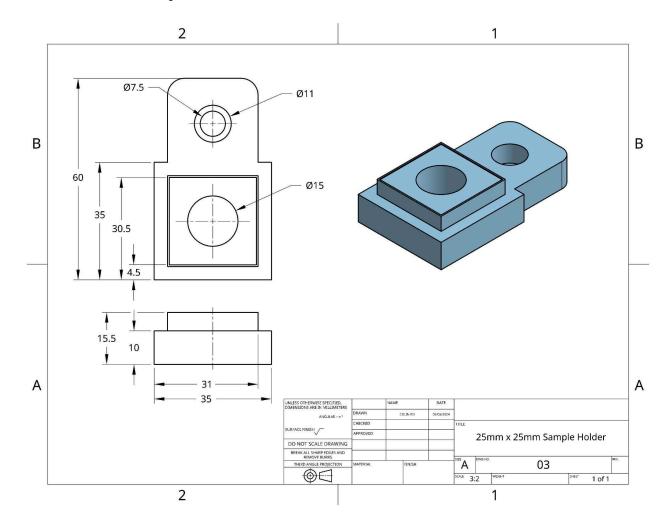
25mm x 25mm Sample Holder Drawing (03)
